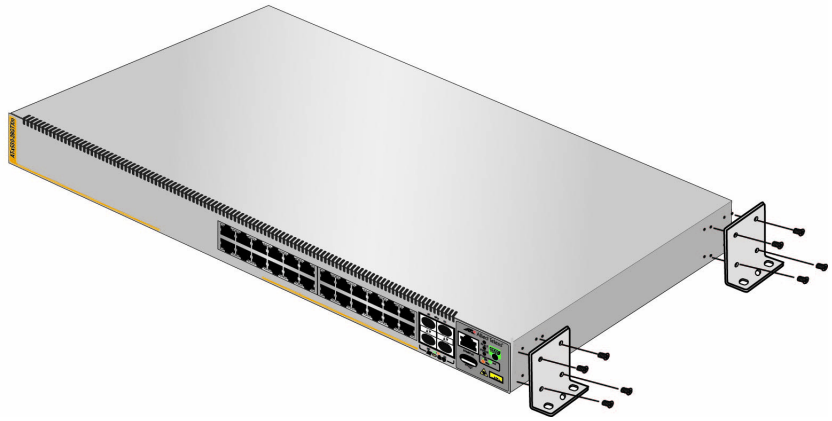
Installing Two Brackets on the x530-28GTXm Switch
